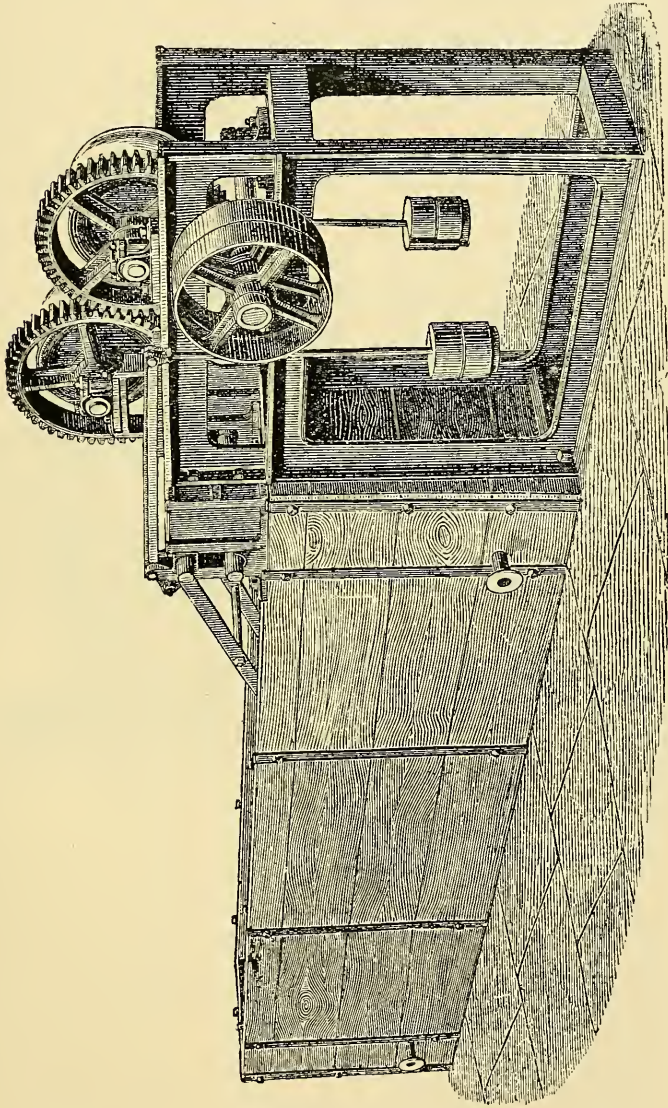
Yarn tarring machine. (Made by Thomas Barraclough, London.)
